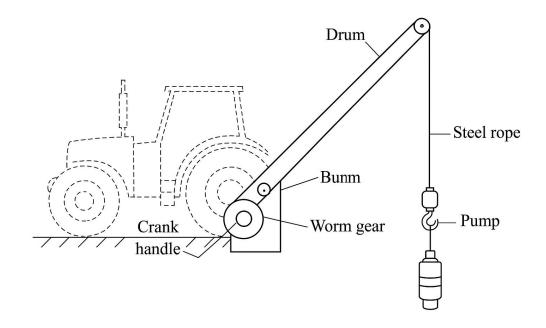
Design Assembly of Tractor Mounted Pump Lifting Mechanism
